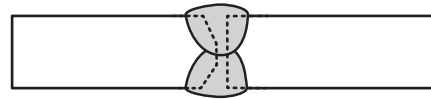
(Continued)—Single-Groove Weld Types
